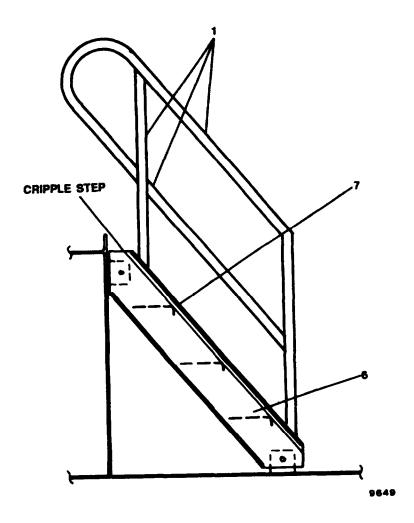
Main Deck Ladders and Handrails (Sheet 3 of 3).
